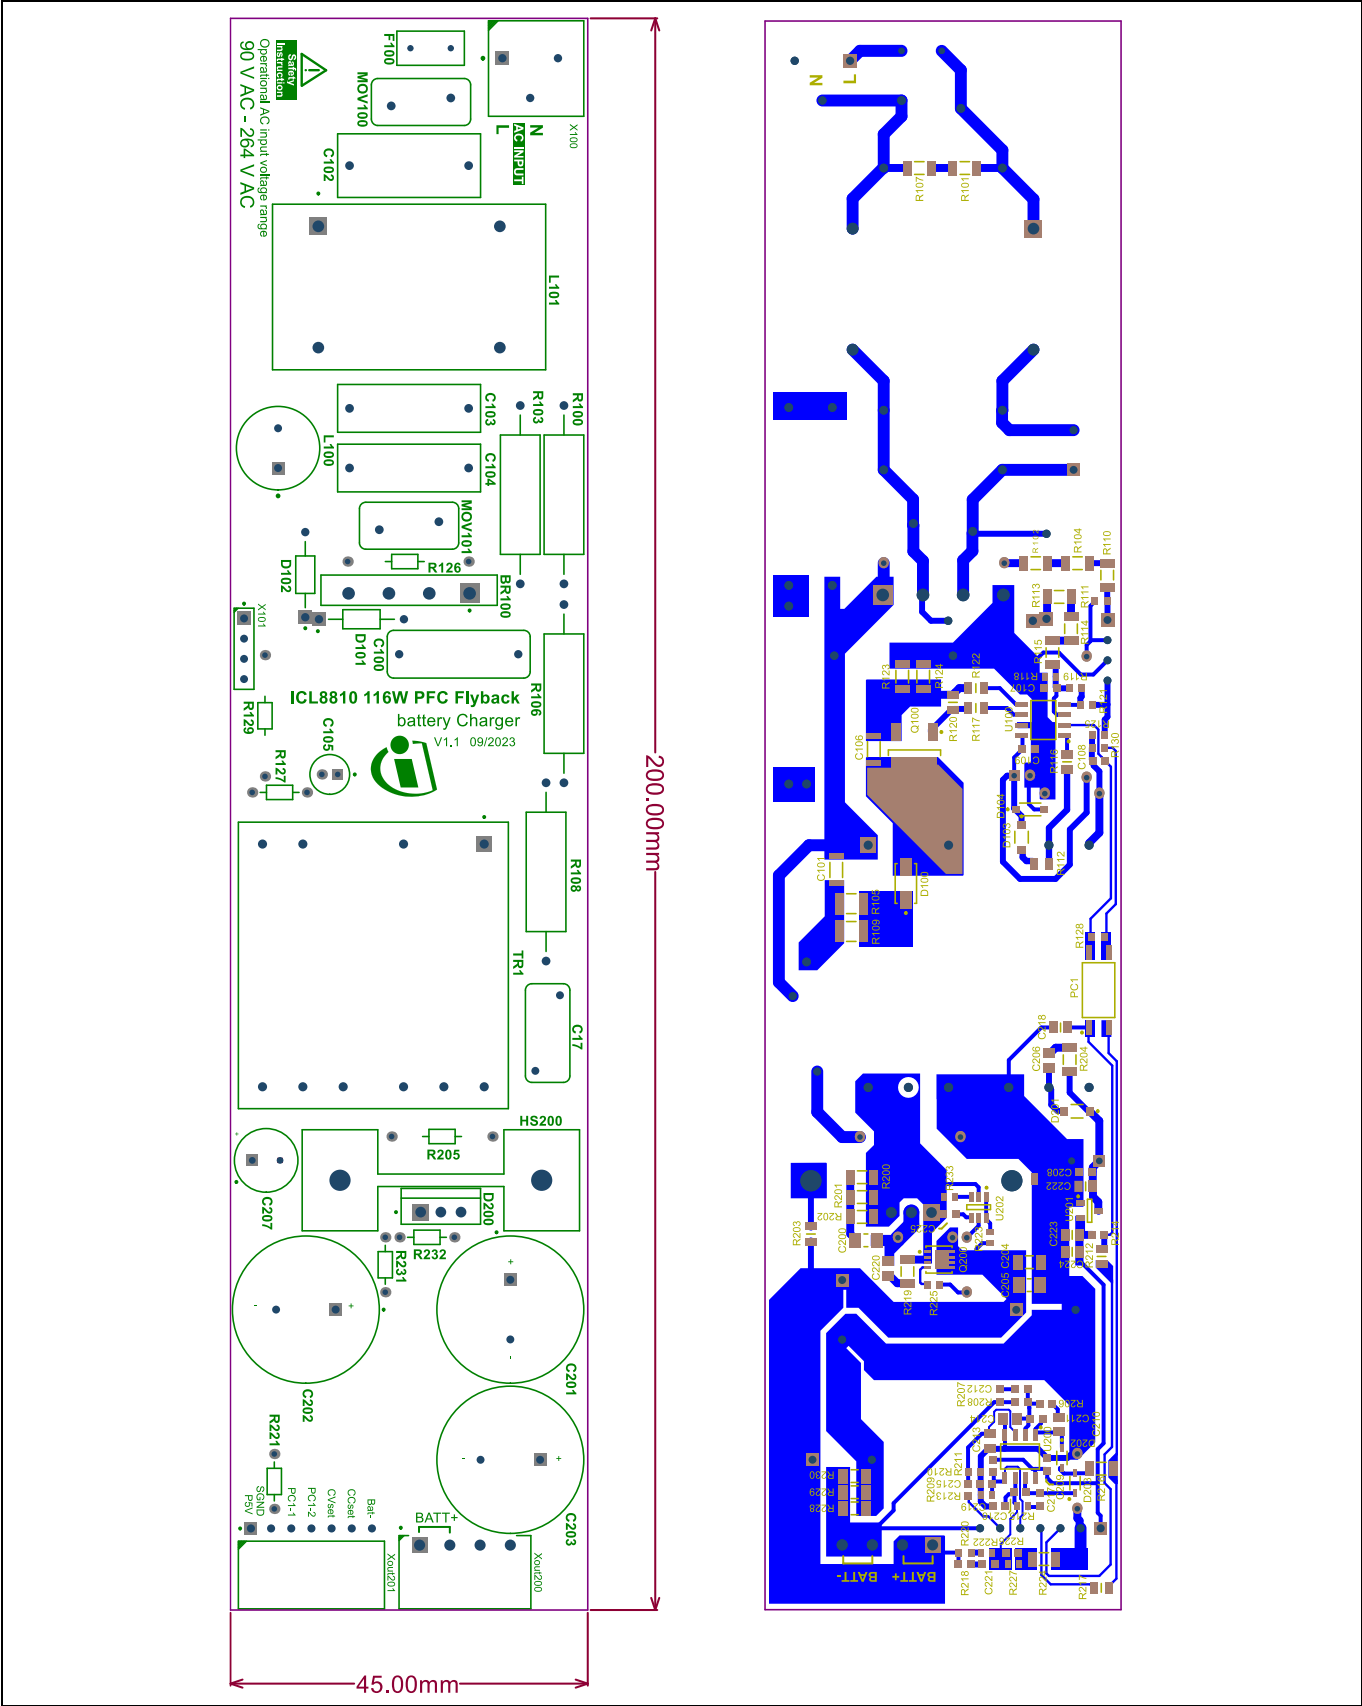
PCB top (left) and bottom (right) layout of the reference design board
